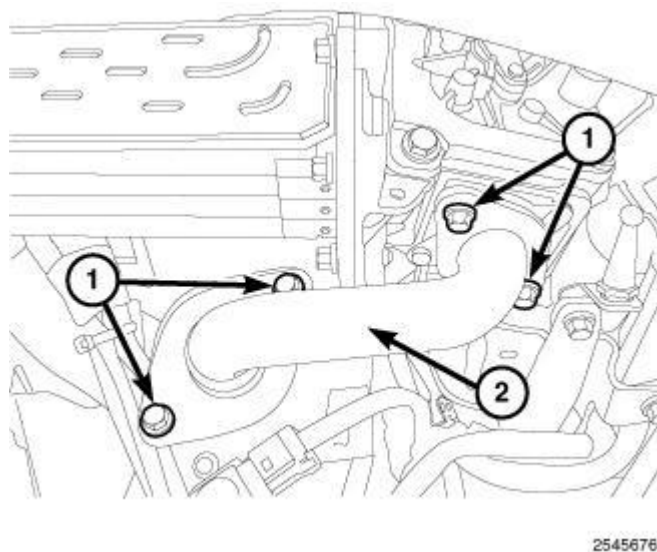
EGR Tube Gasket Onto Mixing Chamber
